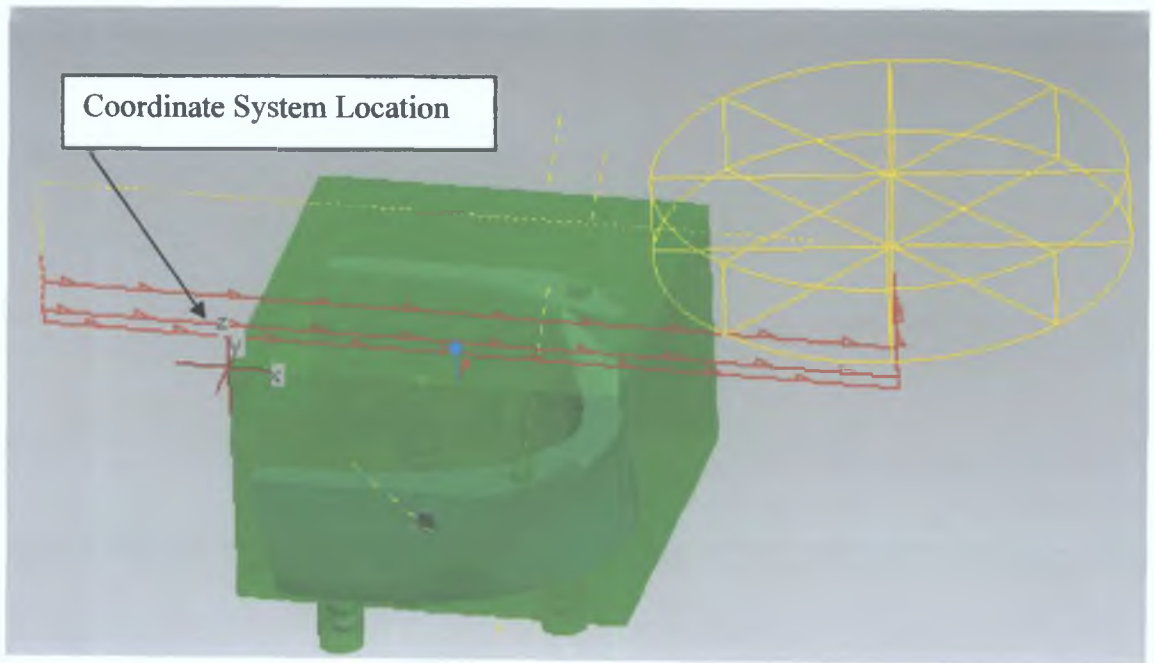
Face Mill Sequence 2 ProEngineer Tool Path.
